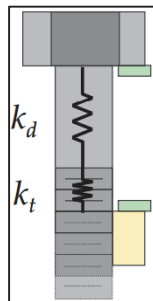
Discrete bolt parts (shank and threaded part) (Culpepper, 2009)
